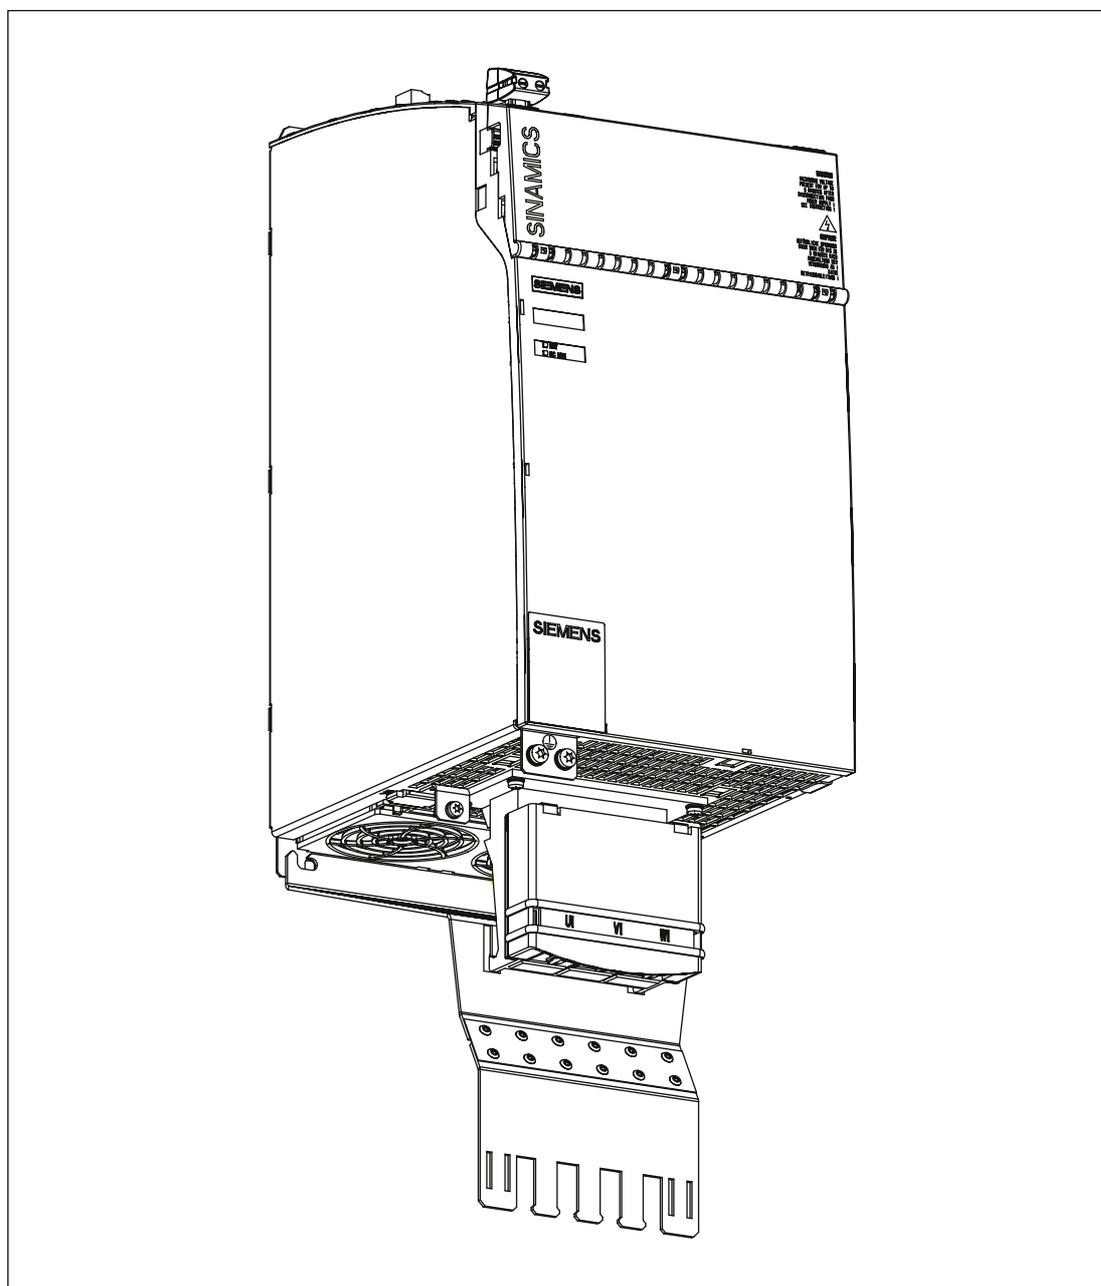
Shield connecting plate for a 200 mm module with internal air cooling
